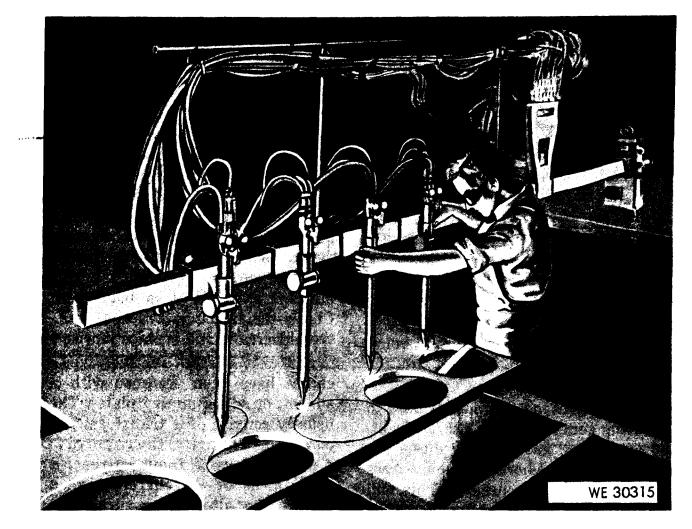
Machine for making four oxy-acetylene cuts simultaneously.
